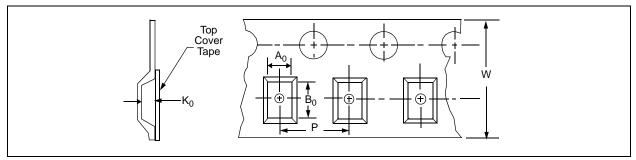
Embossed Carrier Dimensions (8, 12, 16 and 24 mm tape only).
